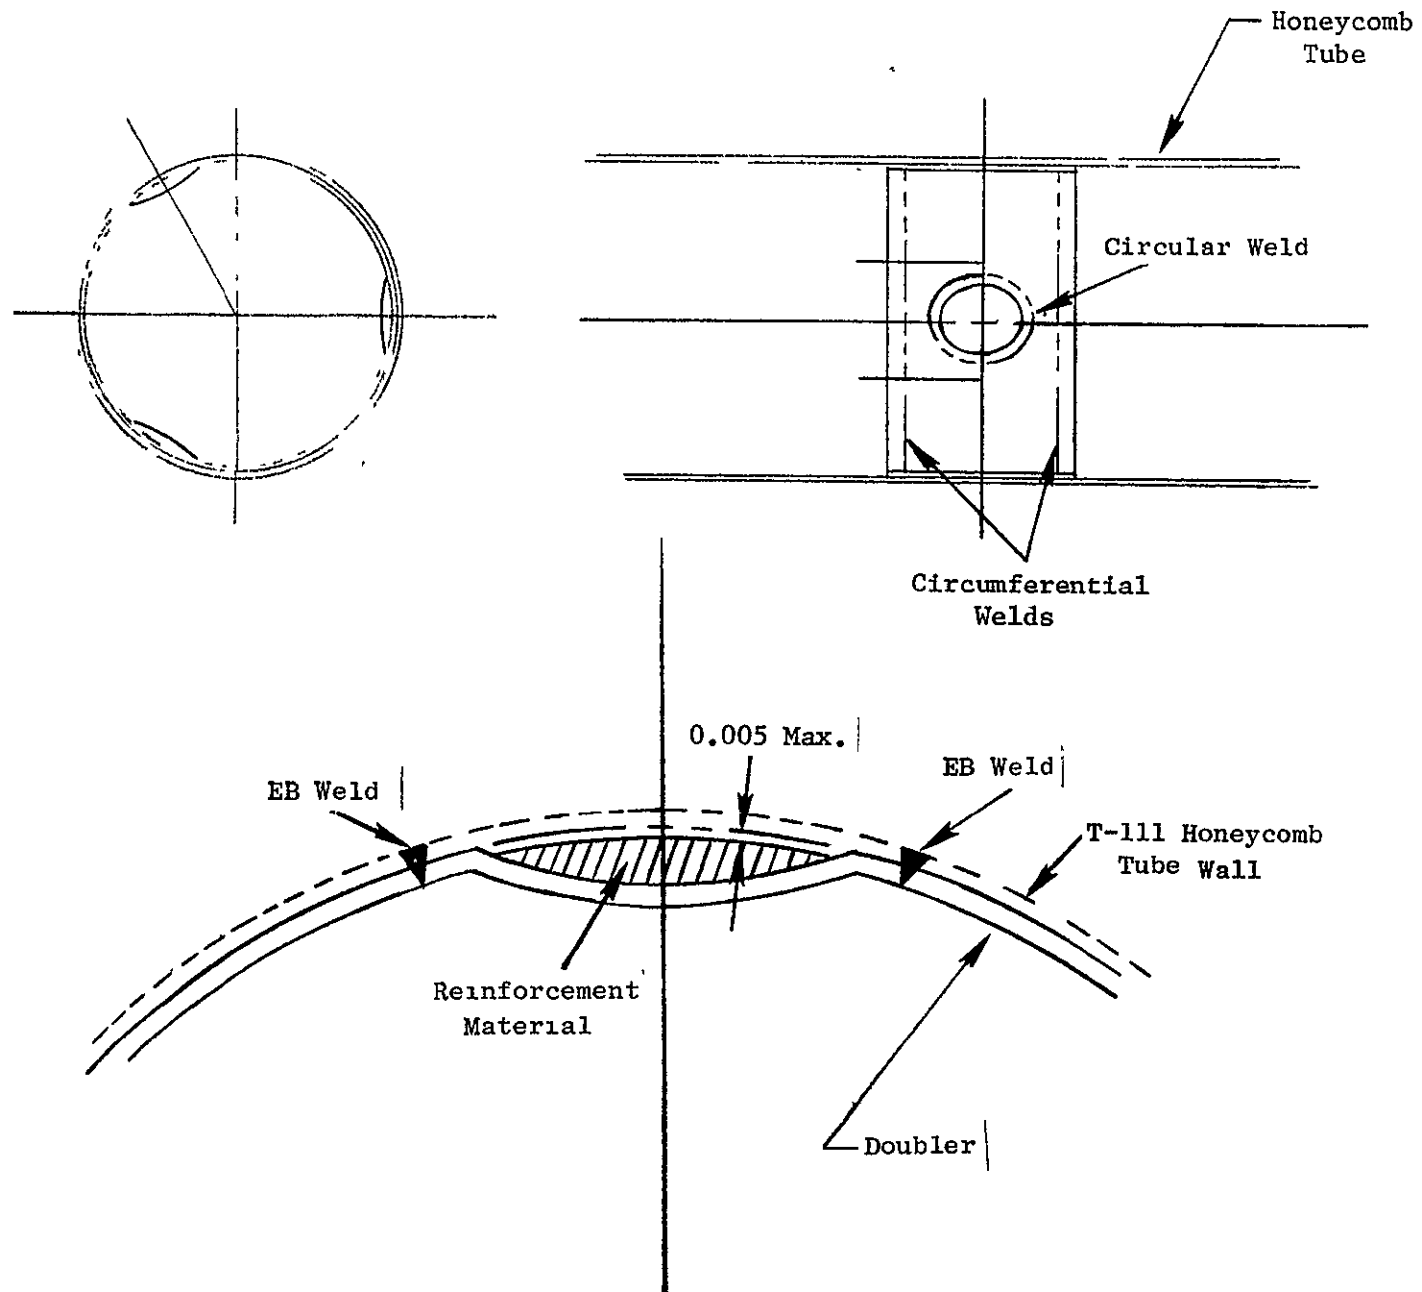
Pattern for EB Weld Attachment of Doublers at Mid-Length of Honeycomb Tube.
